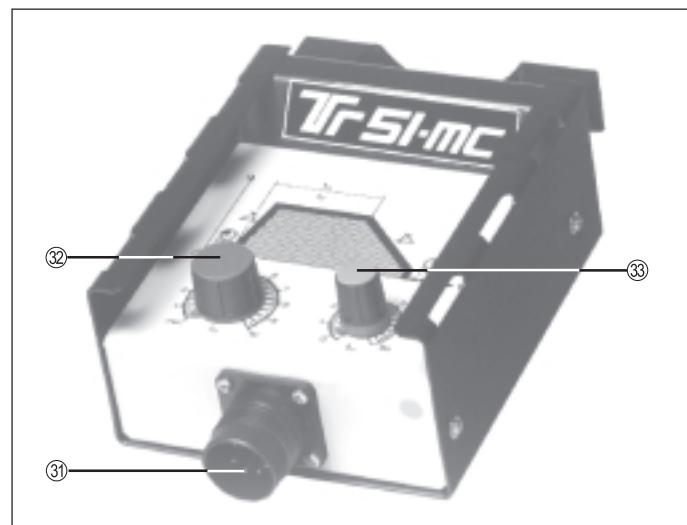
TR 51mc remote control spot-welding unit
